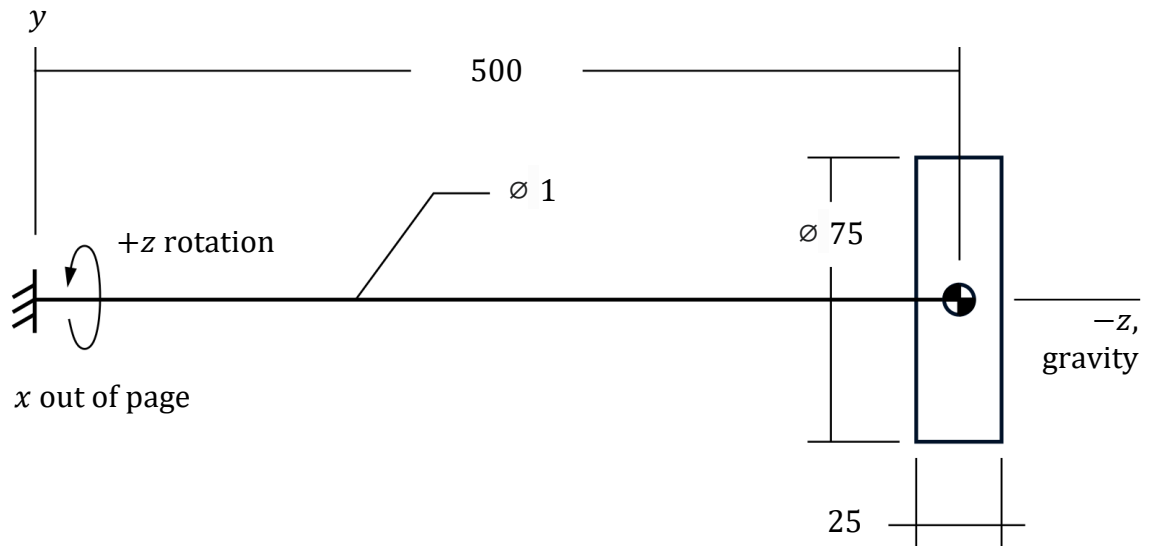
Thin wire rotor dimensions (mm), with gravity pointing right.
